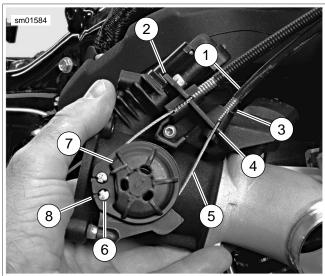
Intake Manifold Mounting Screws: Left Side
